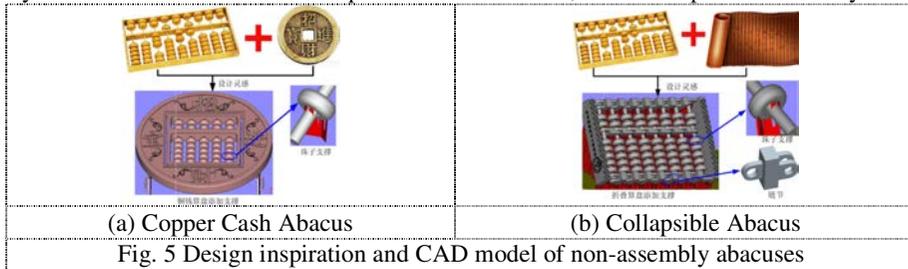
Design inspiration and CAD model of non-assembly abacuses
